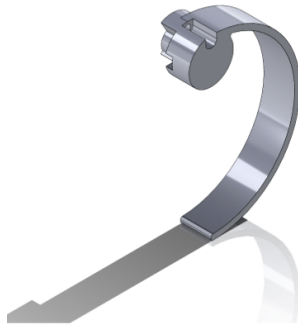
Isometric view of the PP leg print model. Note that the printed part includes an integrated servo motor adapter, thus removing the need for attaching an external servo adapter as was done previously on the TinyRHex robot
